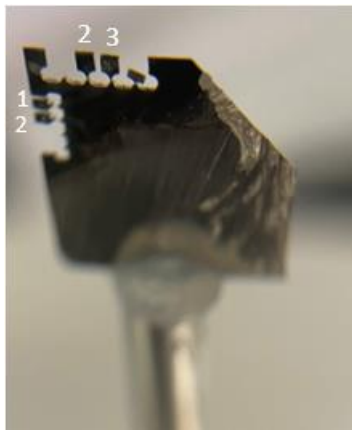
415 steel wedge containing fs-laser-machined micro-tensile specimens. Wedge is placed specimen holder of the Nikon M2 225 KV CT scanner. Numbers indicate specimens that were scanned using x-ray CT. Image taken by Mehdi Mosayehbi, McMaster University (2023).
